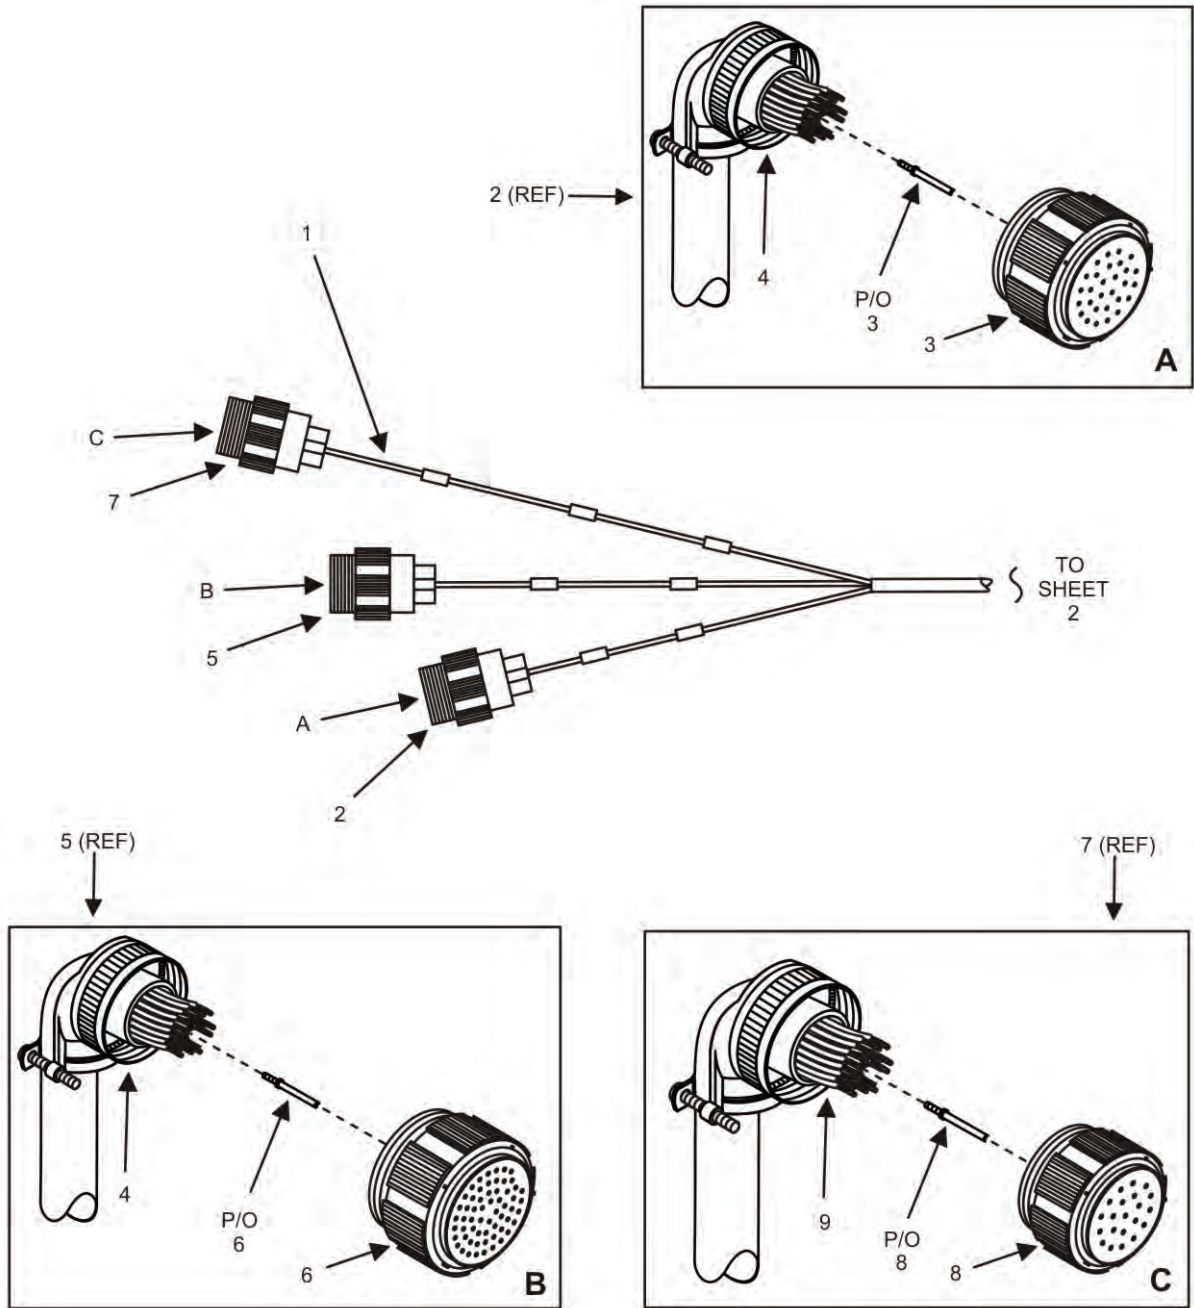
Engine Wiring Harness (Sheet 1 of 13).
